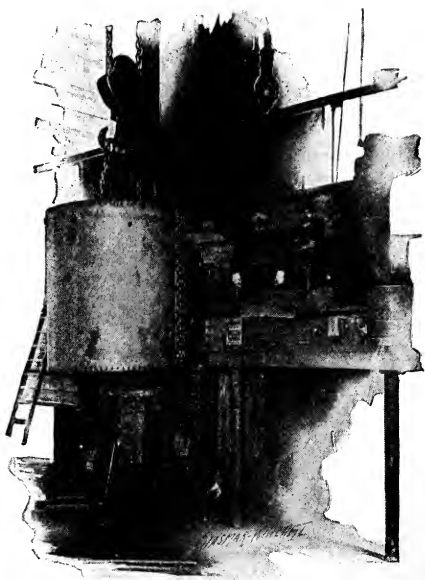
,254.—Hydraulic riveter. Rivets should be driven by hydraulic pressure in so far as possible, and headed up full and true with heads in line, preferably of button shape. No form of riveting compares with the work done by the hydraulic riveter. The full pressure can be applied throughout the full length of the stroke so that the rivet is properly upset, thoroughly filling the hole from end to end, and also squeezing the plates close, and holding them for several seconds while the rivet is contracting or cooling off. While apparently all methods of hydraulic riveting are the same, there are, however, two distinct methods. The start is the same; the finish is different. The results vary as widely as their costs. First method: Ordinarily, pressure is applied, the rivet formed and the pressure then immediately released, whereupon the work is considered done. No allowance is made for the fact that the hot rivet contracts as it cools. Even though the rivet completely filled the rivet hole when formed hot under pressure, the metal necessarily contracts as it cools. Hence, as the pressure has been removed, the hole remains unfilled when the rivet assumes its final form after cooling. As a consequence, the plates are held together by rivets smaller than the rivet holes, thus allowing considerable play, often resulting in leaks. Second method: The best practice is to apply the full pressure for several seconds until the rivet is cold, thus allowing the rivet to cool and shrink under pressure. The plates are squeezed closely together and as the rivet contracts in cooling, the undiminished pressure forces the metal to completely fill the rivet hole from end to end during the entire process of contraction until the rivet assumes its final form when cold. As a consequence, the plates are held tightly together by rivets, completely filling the rivet holes, thus preventing any play whatsoever and eliminating leakage. Furthermore, the rivets do not require such intense heat with this method, therefore there is no risk of burned rivets. *The first is the ordinary method because it is cheap.* A dozen rivets can be driven if the pressure be immediately released while one is being driven where the pressure is kept on until the rivet cools. *Manufacturers who give shop cost precedence over character or quality of work use the first method. Those who aim to do the best work regardless of cost employ the second method with its consequent greater cost, because a boiler is improperly built if constructed by any other method.
